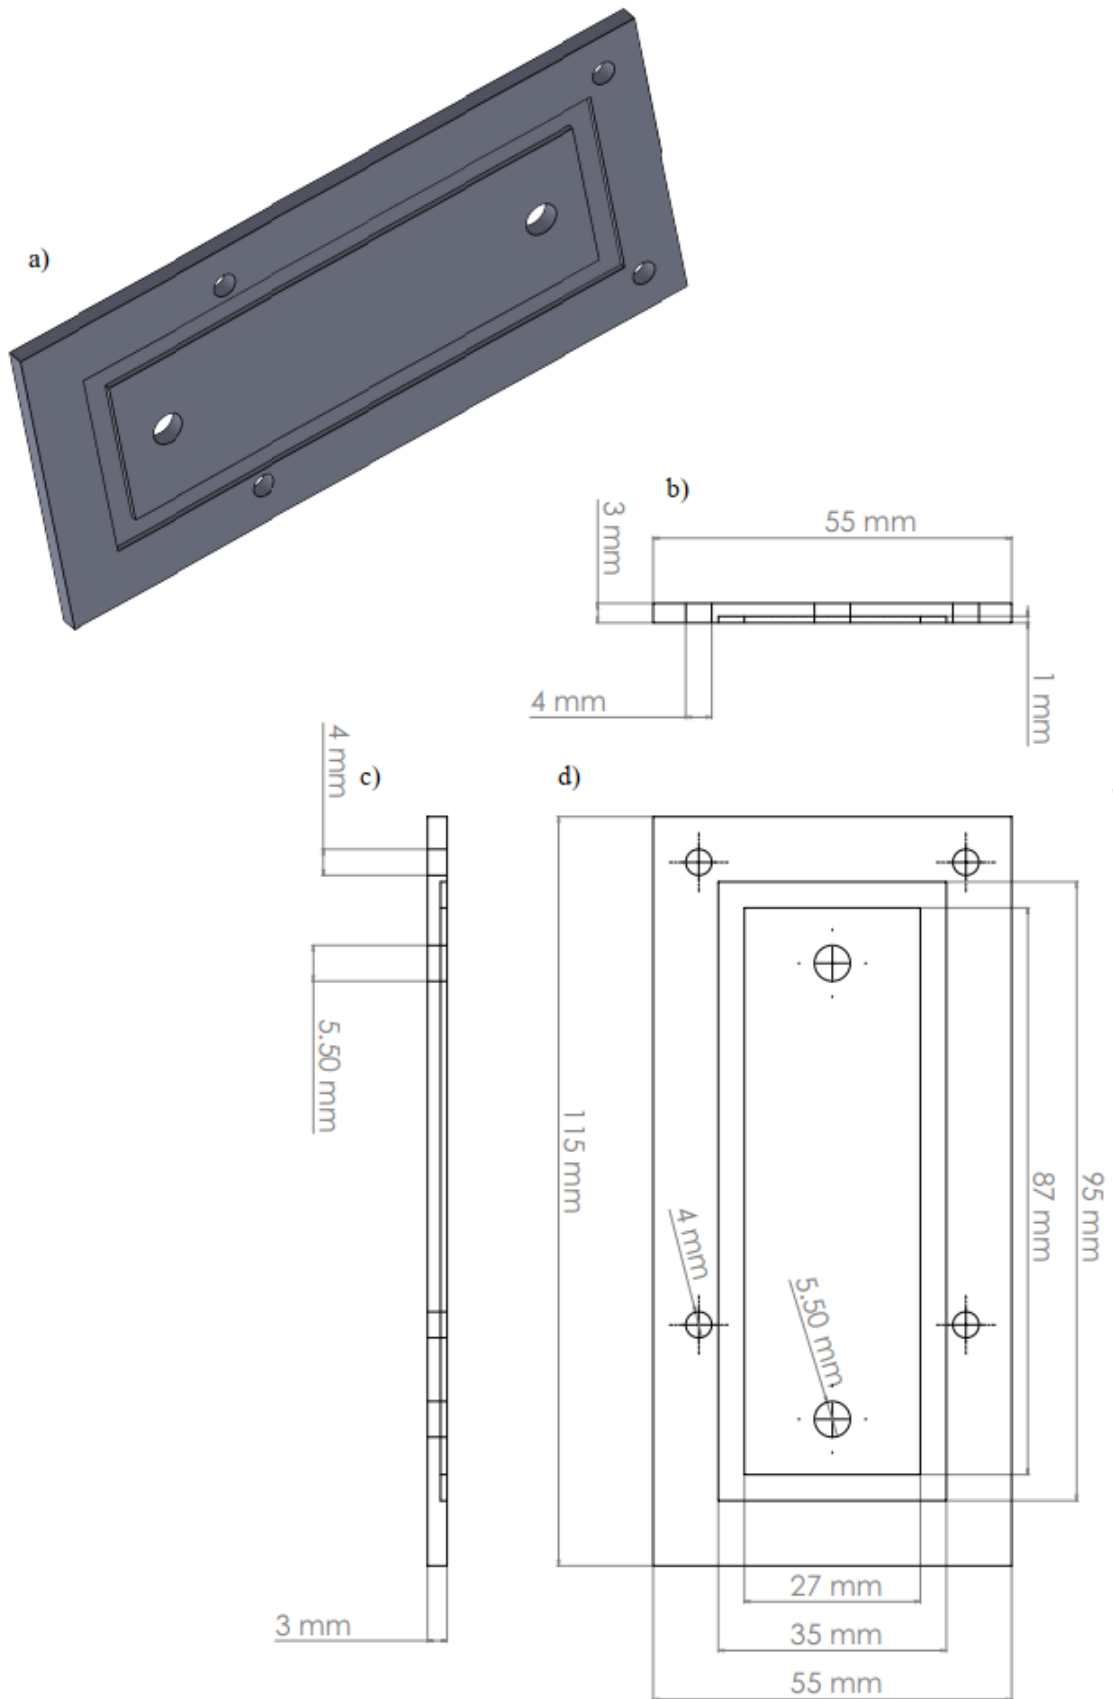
3D design of cap of sample holder with the size of 5 cm x 2.5 cm a) 3D view, b) Front view, c) Left view, d) Top view.
